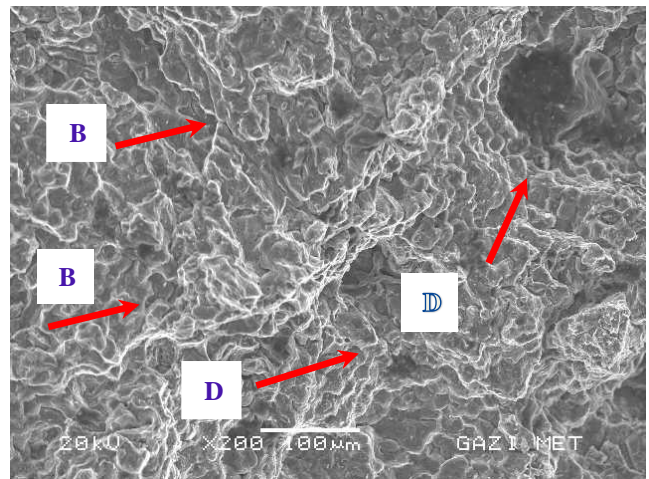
SEM images of fractured surface after tensile test of aluminium alloy; B: Brittle, D: Ductile
